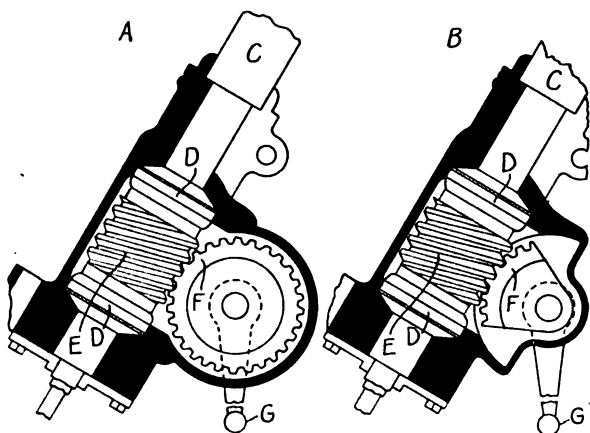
Worm and Wheel, and Worm and Sector Types of Steering Gears.
